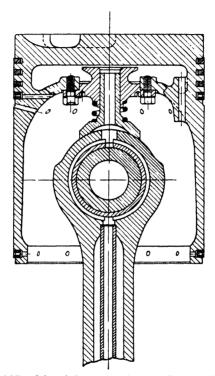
Oil-cooled piston with spring-loaded collector
